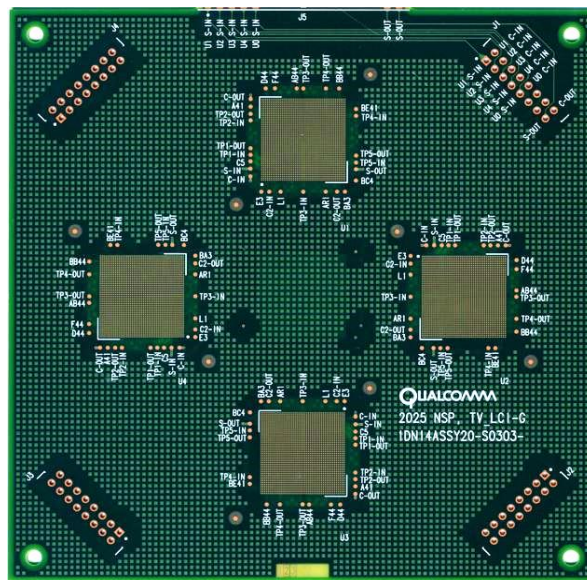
Board design for drop testing of 18.5mm x 18.5mm glass packages.
